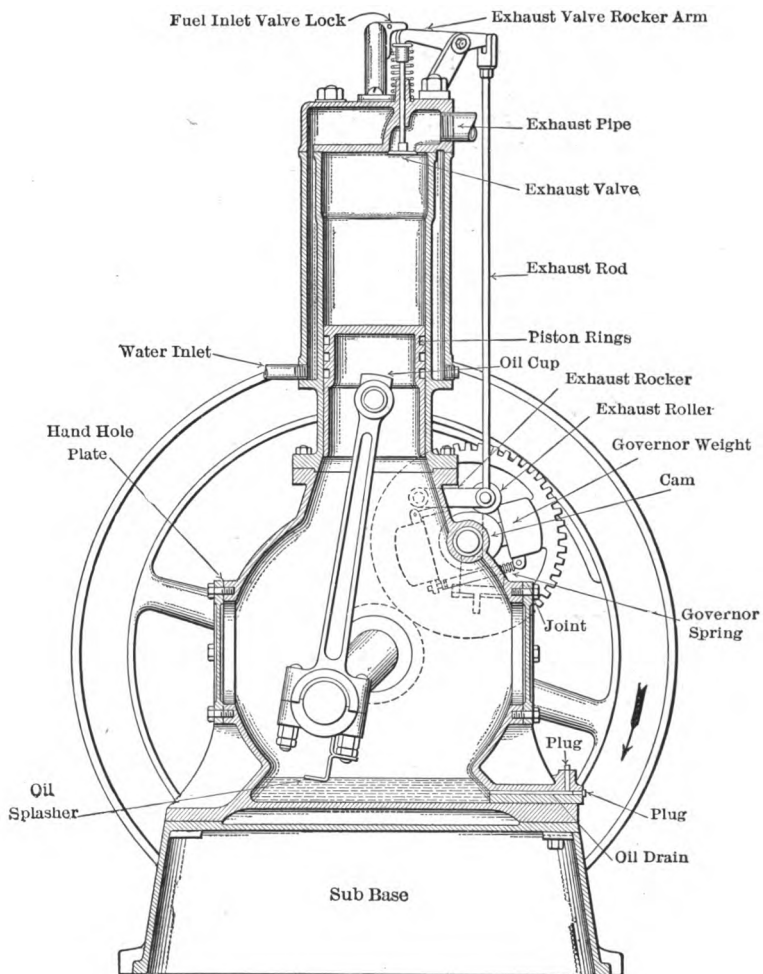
Section Fairbanks-Morse Type T Engine.
